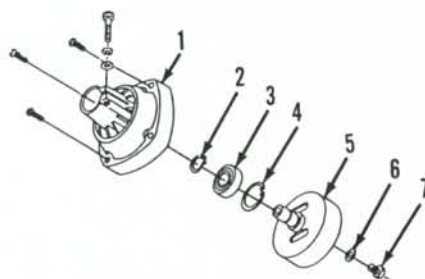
Exploded view of clutch drum assembly used on some models.
